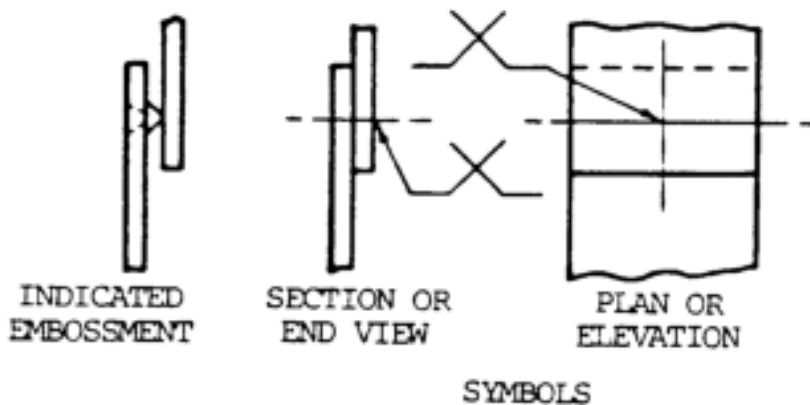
Embossment on other-side member of joint for projection welding.
